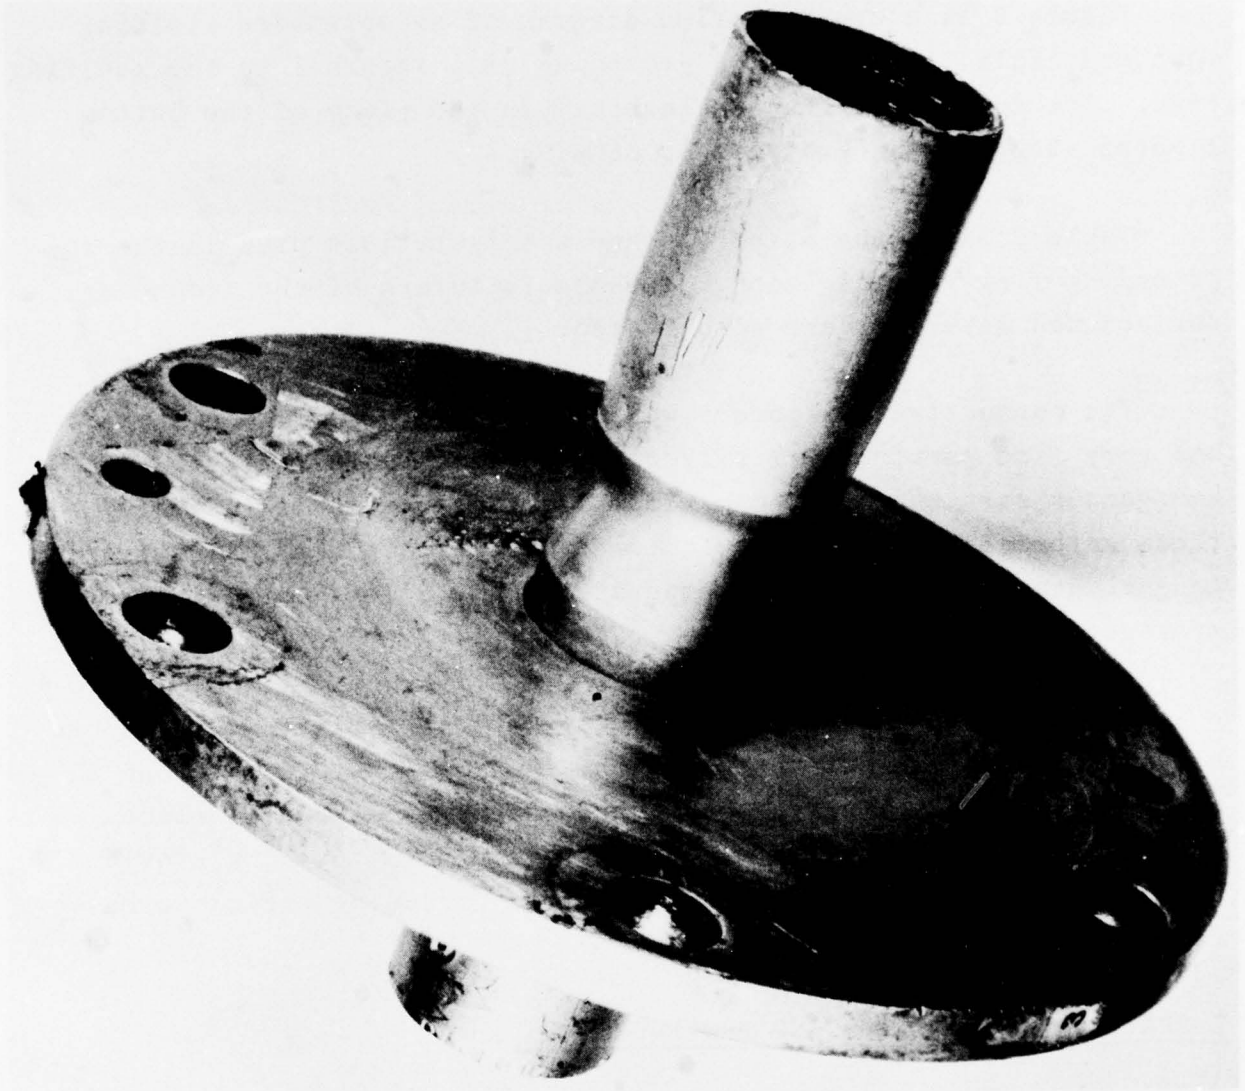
STUFFING TUBE WELDED INTO CIRCULAR PLATE FOR USE IN COAXIAL TEST FIXTURE
